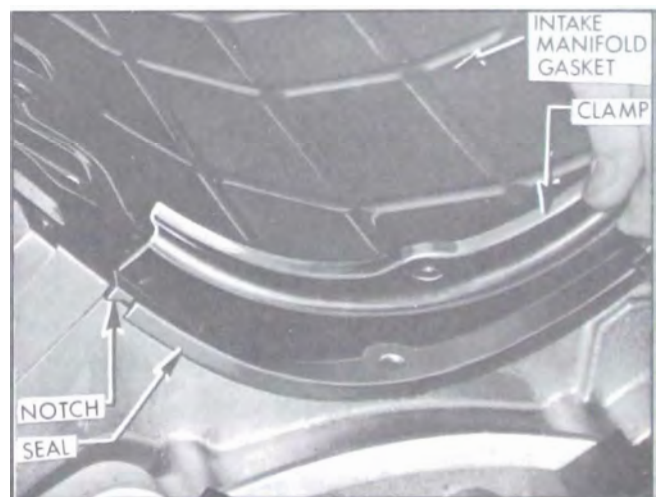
V-8 Intake Manifold Gasket, Clamp and Seal
